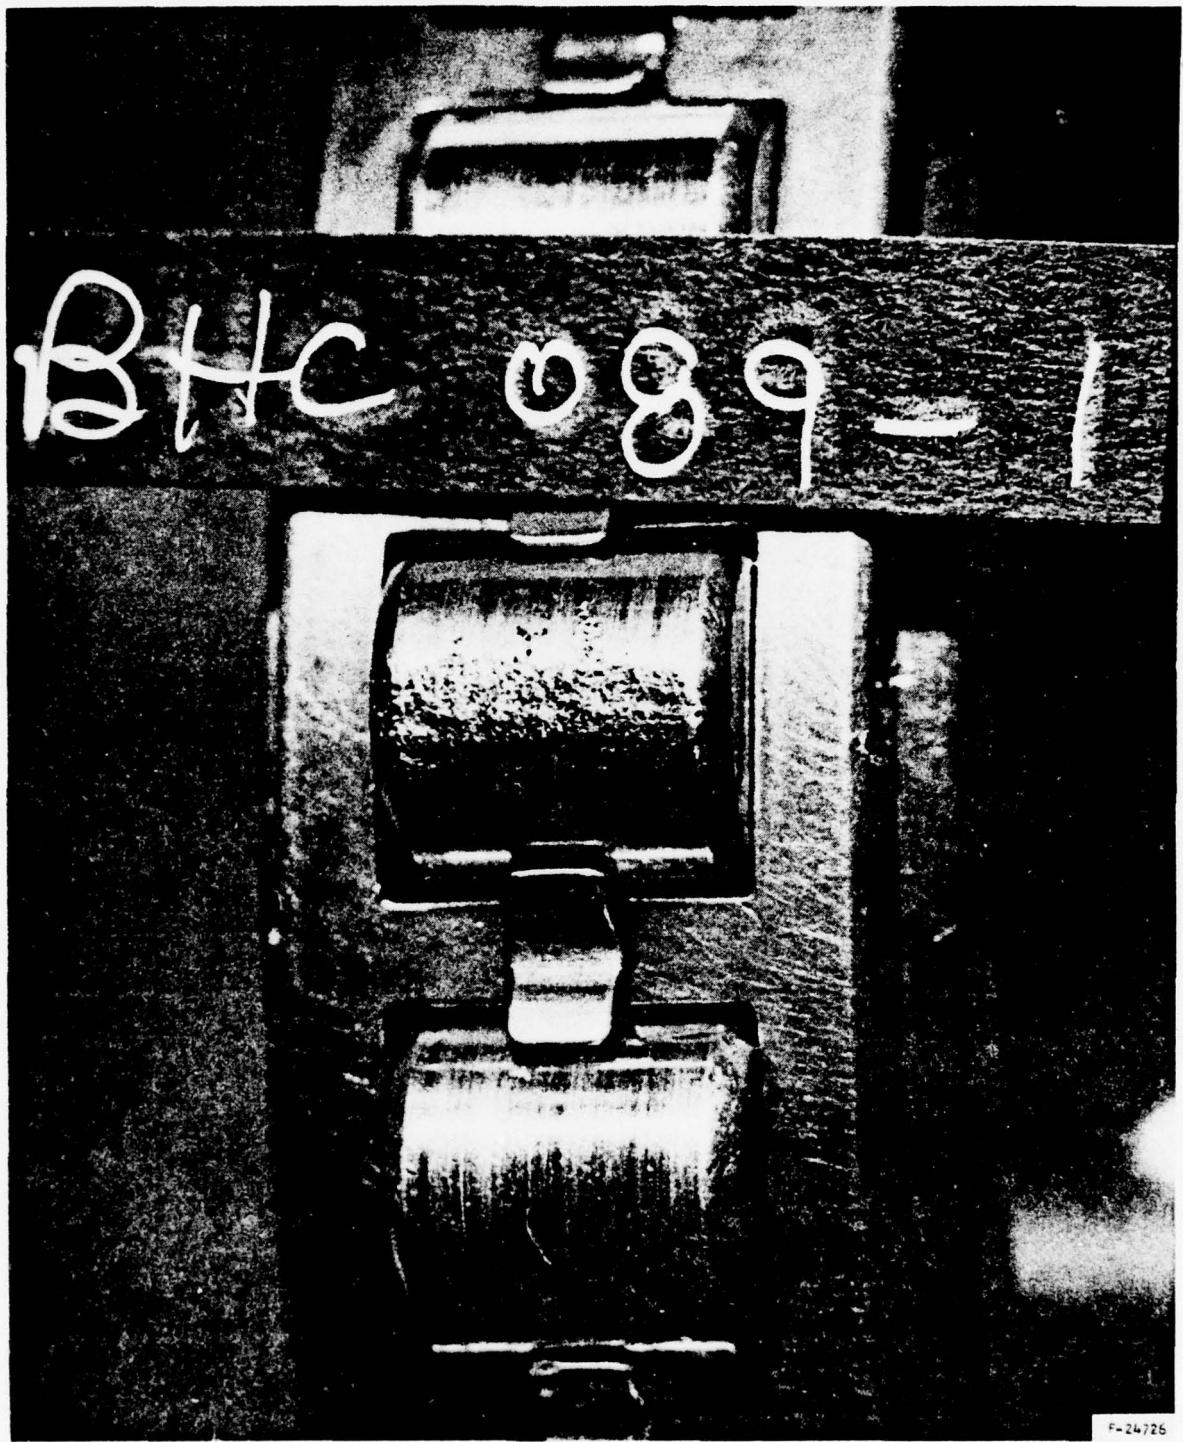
BHC 089 Roller Bearing Used in Tail Rotor Output Quill, Transmission, and in 42° Gearbox (Single Roller Spall)
